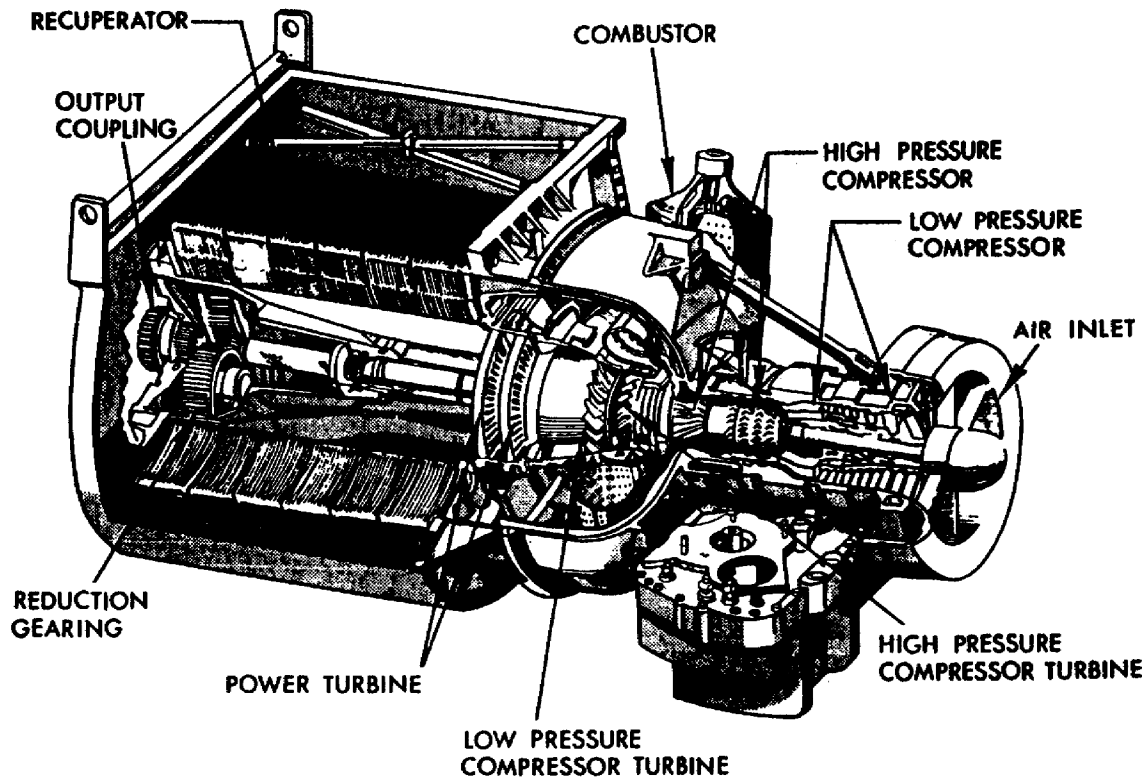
Diesel Turbine Engine Components Construction and Operation.
